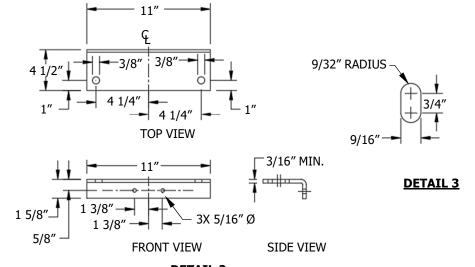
REMOVABLE LINK ASSEMBLY FURNISHED BY MANUFACTURER SEE TABLE 1
